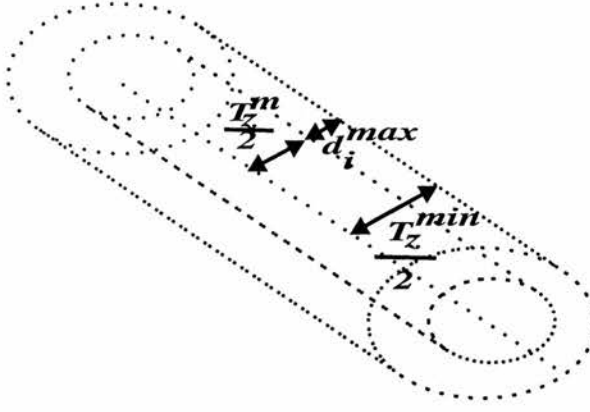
Illustration of designed tolerance zone (size  $T_z^m$ ) and minimum test tolerance zone (size  $T_z^{min}$ ) when geometric element being offset is a straight line.
